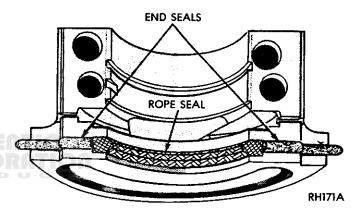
Rear Main Bearing Cap (5.2L Engine)
